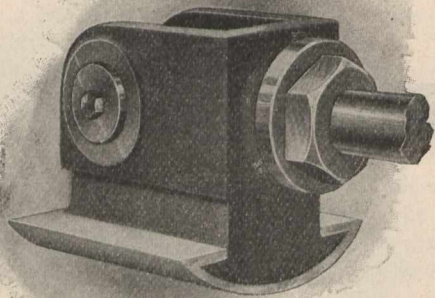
Cross-head of Medium-speed four-valve Engine. (three-quarter view).
